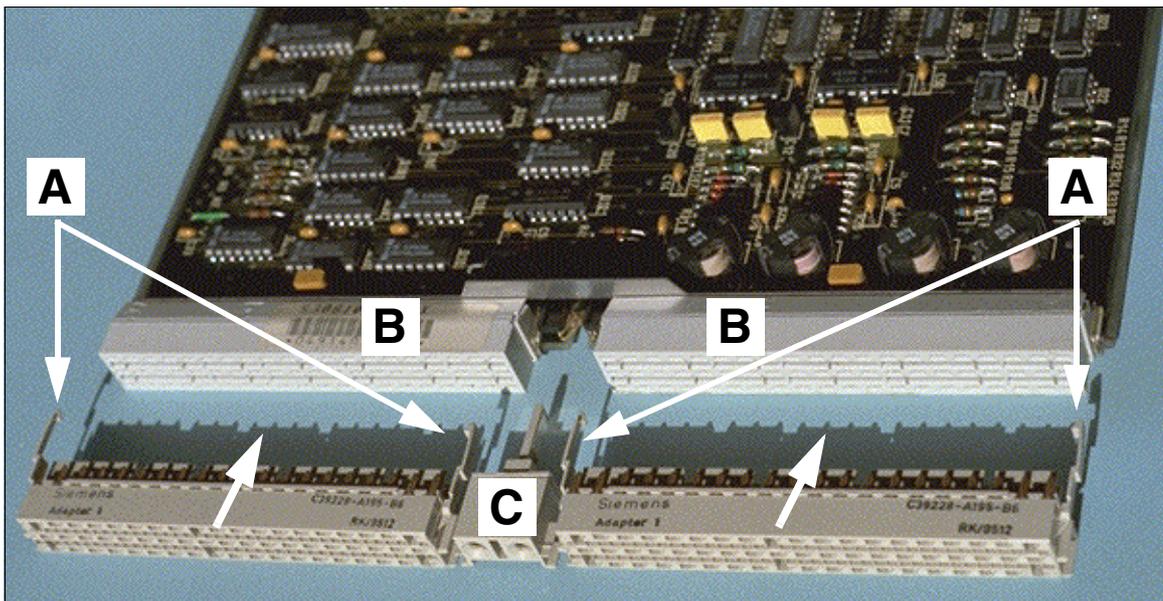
Installing the SIVAPAC-SIPAC Board Adapter
